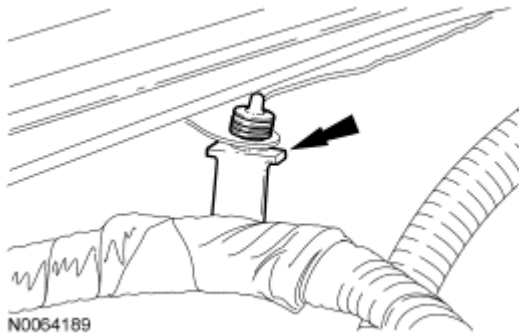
Detaching Pin-Type Wire Harness Retainer From Cowl
